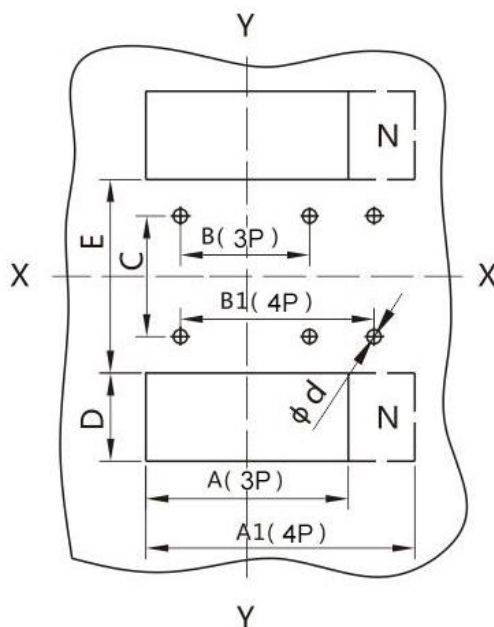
Hole size of mounting plate for plug-in back panel wiring
